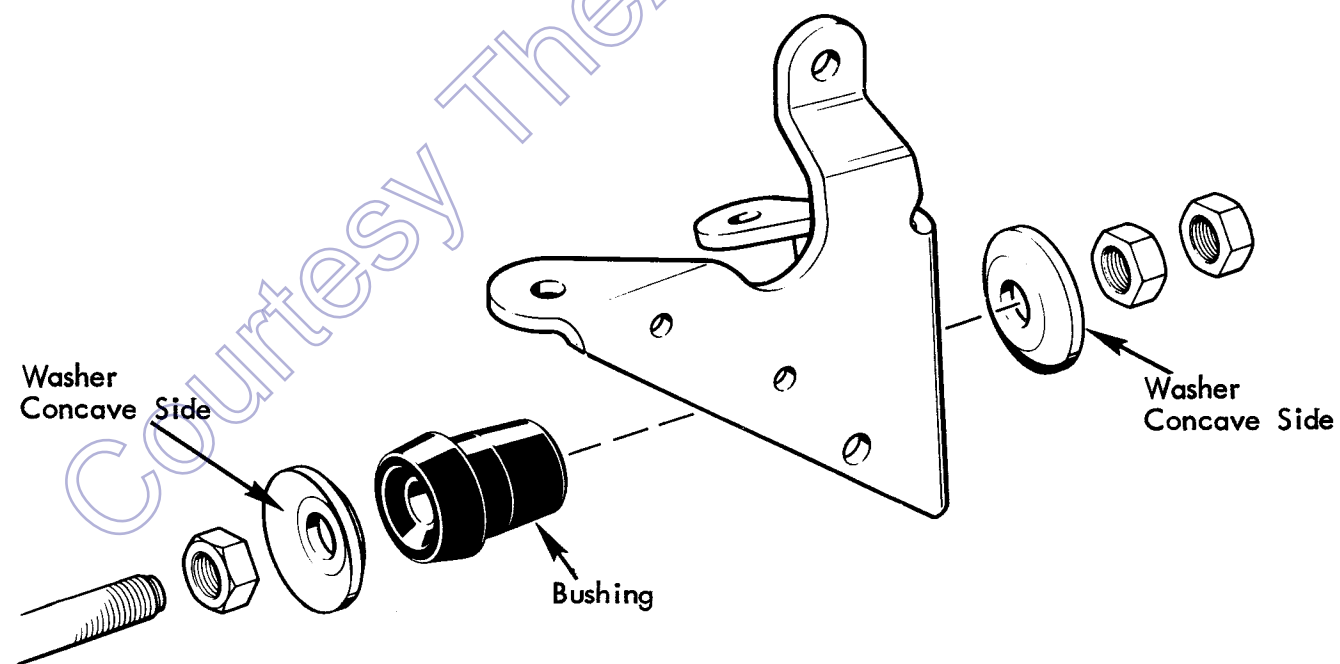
ONE PIECE BUSHING ASSEMBLY SEQUENCE
